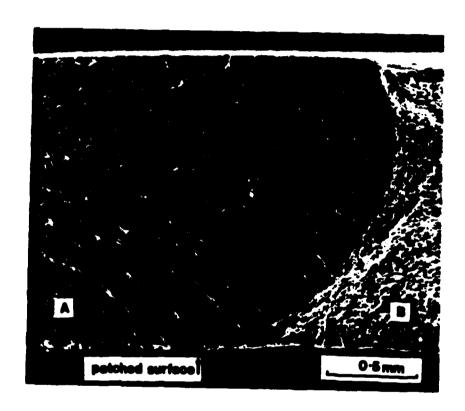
Scanning electron micrograph of fatigue fracture surface on aluminium panel showing the asymmetric crack front shape of fatigue crack (A) at enset of final tensile failure mode (B)
